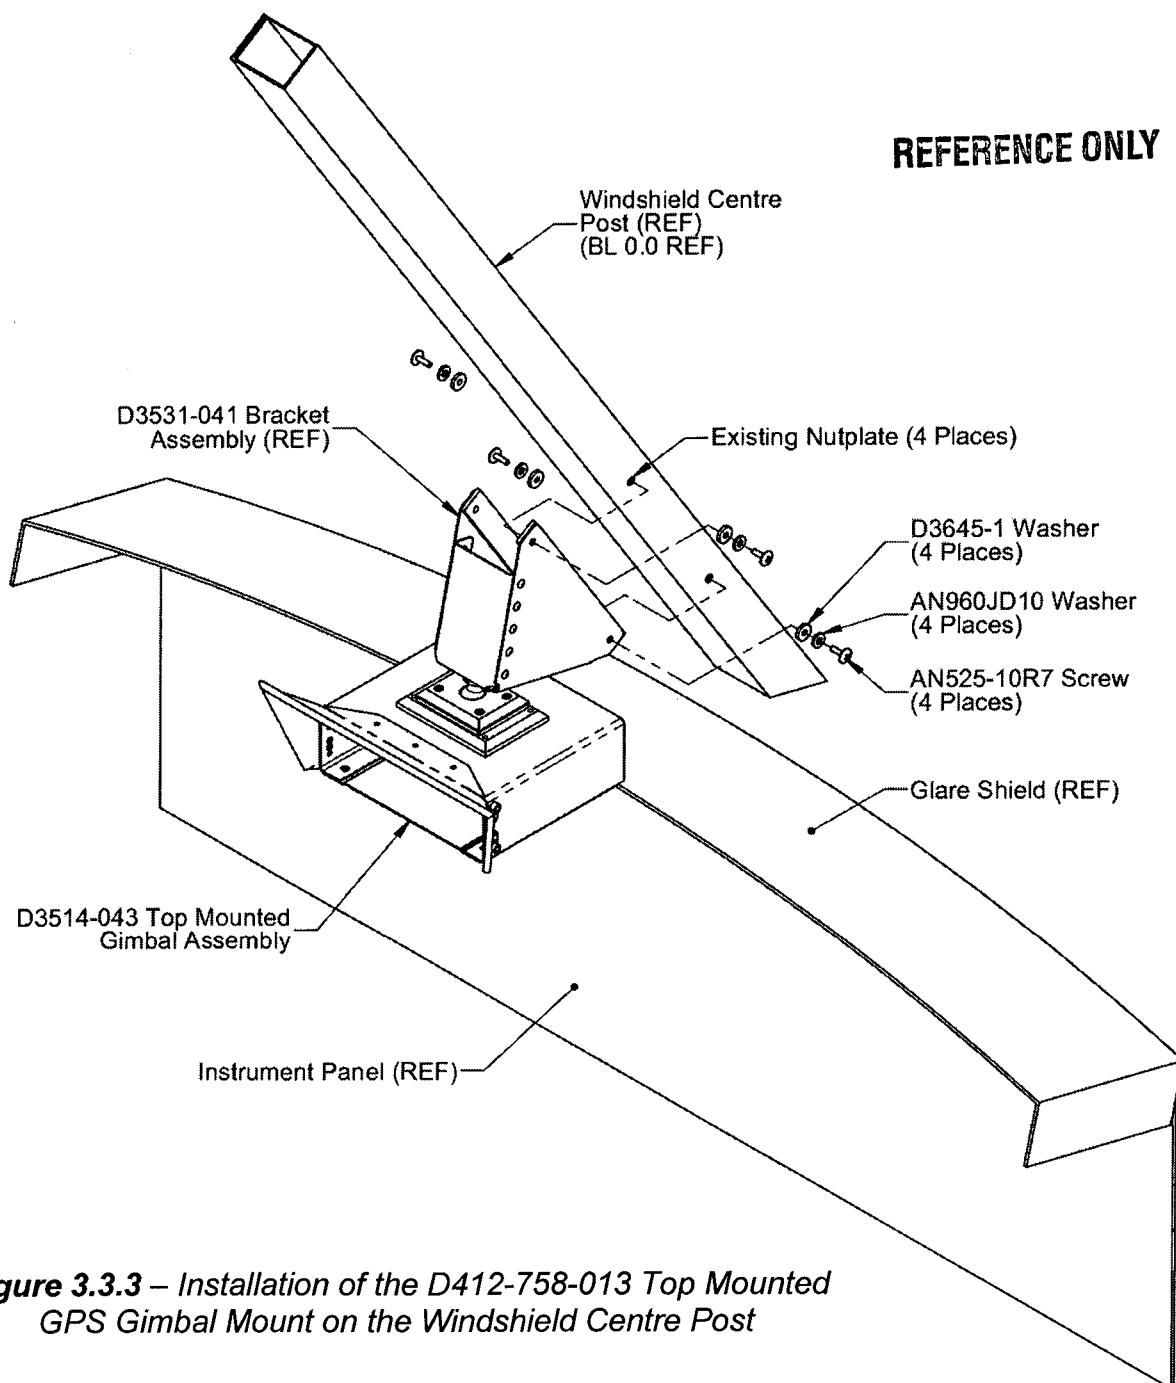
Installation of the D412-758-013 Top Mounted GPS Gimbal Mount on the Windshield Centre Post
